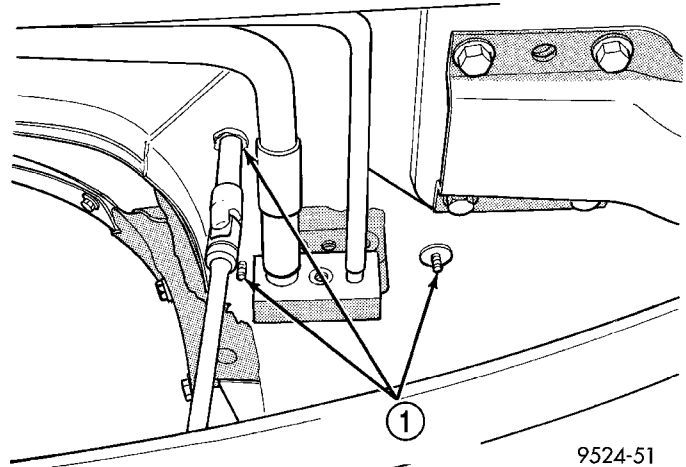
Rear HVAC Housing Mounting Studs – Typical
